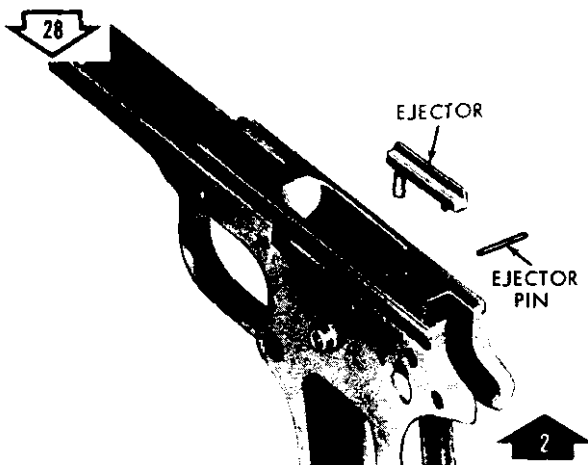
Disassembly/assembly of receiver group (6 of 7).
